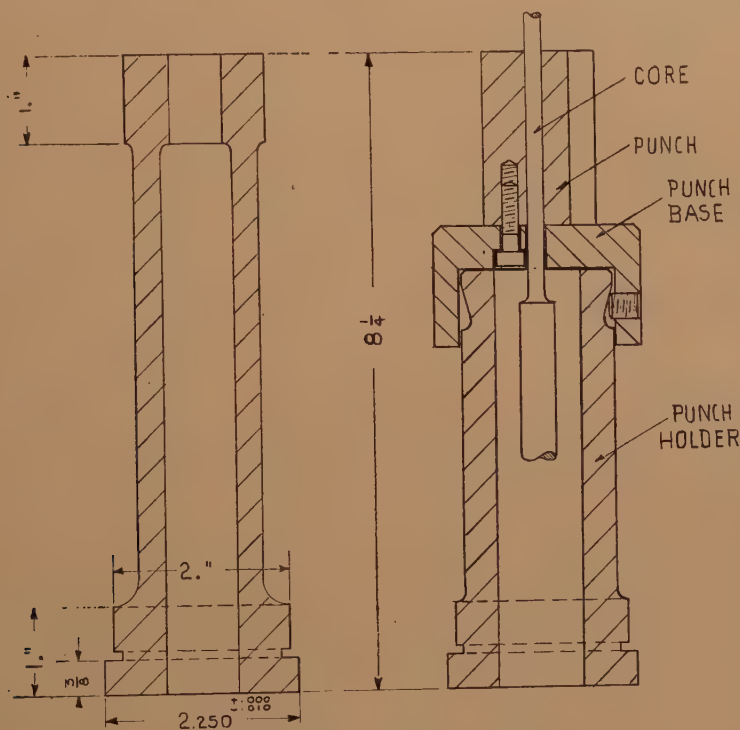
PUNCH AND PUNCH ASSEMBLY.
